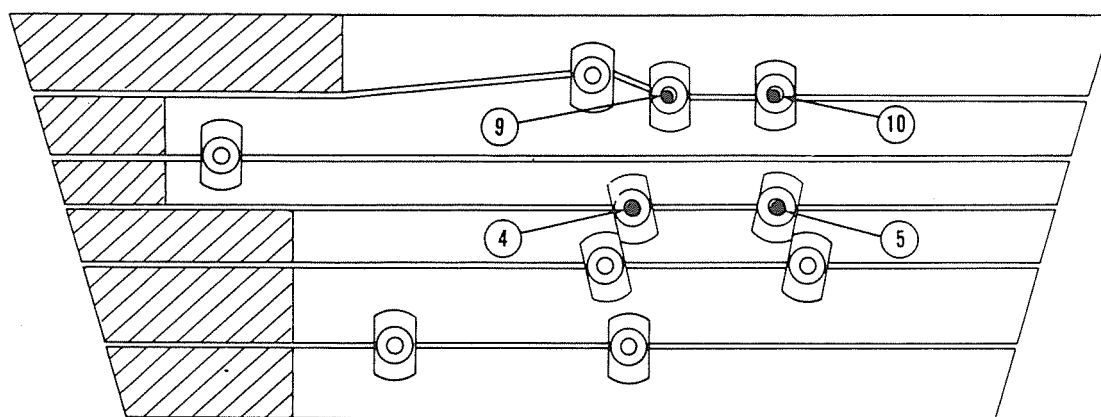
(Sheet 2 of 7 Sheets). Elevator and Elevator Spring Control Tab Control System - Torque Tube, Pulley Brackets, Station 37
